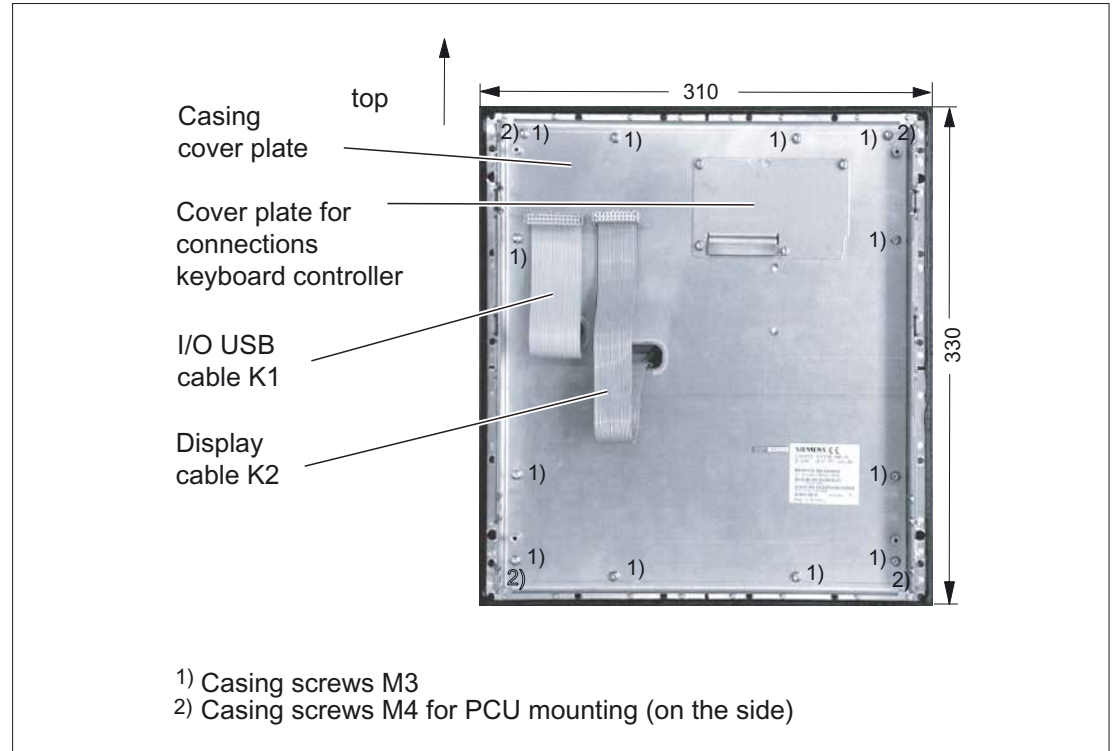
Rear side of operator panel front with arrangement of interfaces and mounting screws
